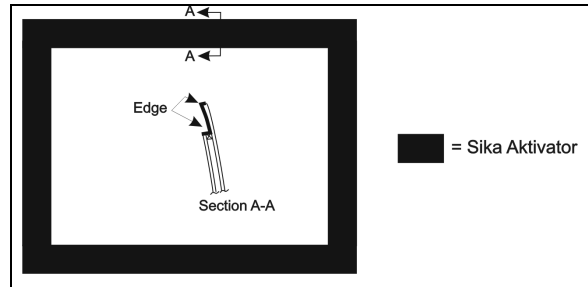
FACE FIXED WINDOW AND HALF-WINDOW – SIKA AKTIVATOR
